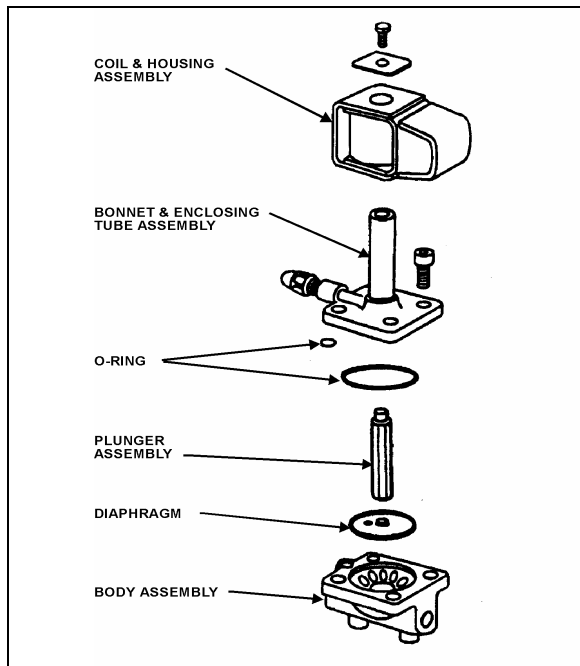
REFRIGERANT SOLENOID VALVE 22044
